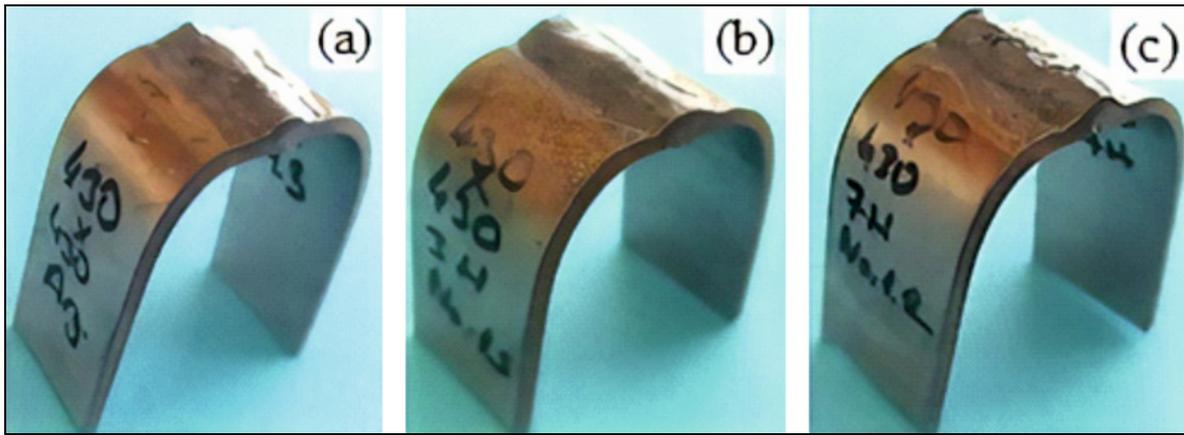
Bending test behavior of the welded samples: (a) GMAW-1, (b) GMAW-2, and (c) GMAW-3.
